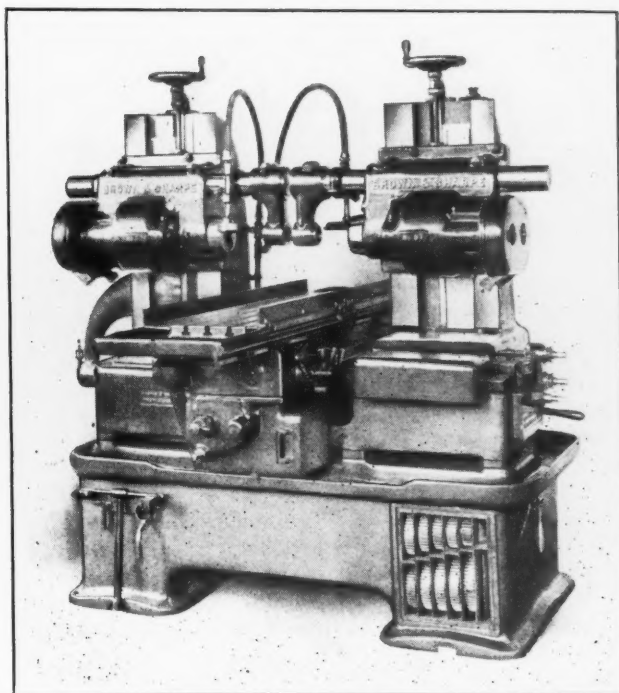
Brown & Sharpe Automatic Duplex Milling Machine
